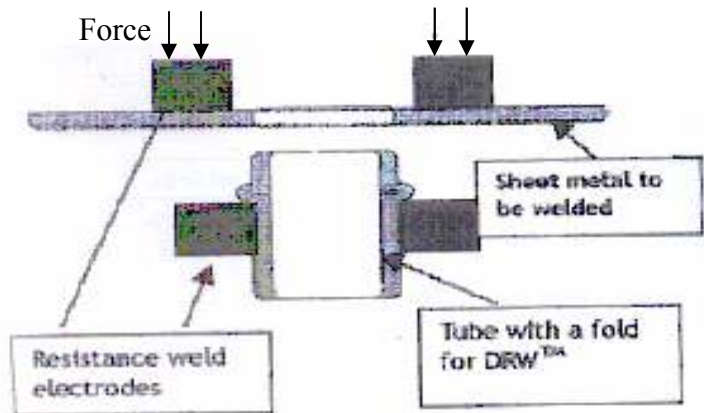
Resistance weld set-up of DRW of a tube to a solids
